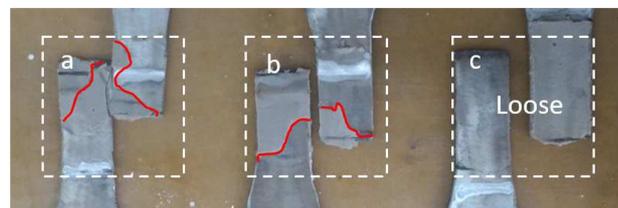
Failure mechanism of ASK3M connection; (a) ASK50, (b) ASK75, (c) ASK100
